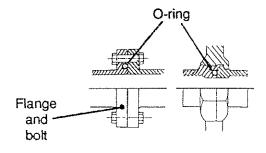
(a) On clamping, the O-ring provides a pressure seal.
